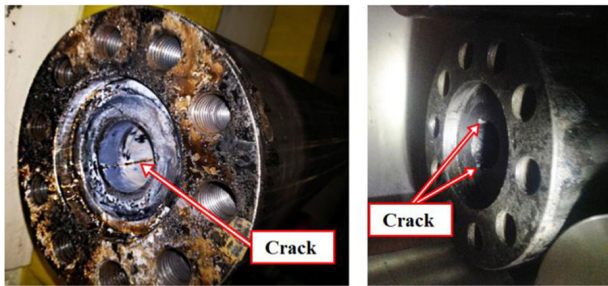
Cracks in a bimetal cylinder of injection molding machine.
